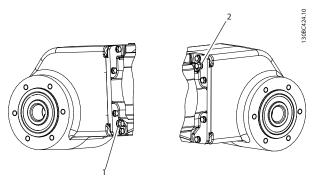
VLT® OneGearDrive Oil Screws 1 and 2
